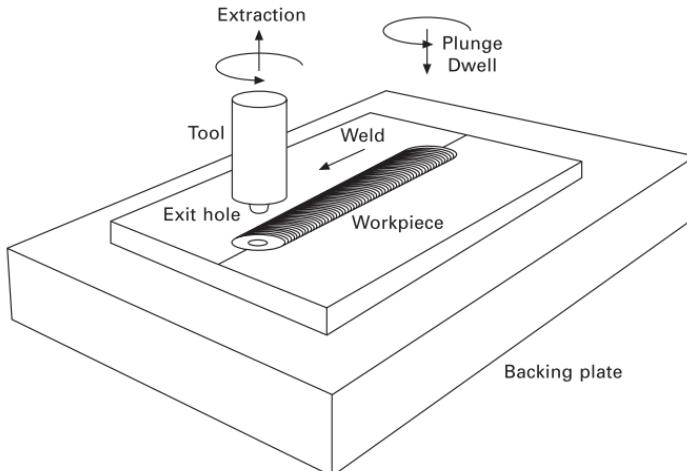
Schematics of Friction Stir Welding [2-3]
